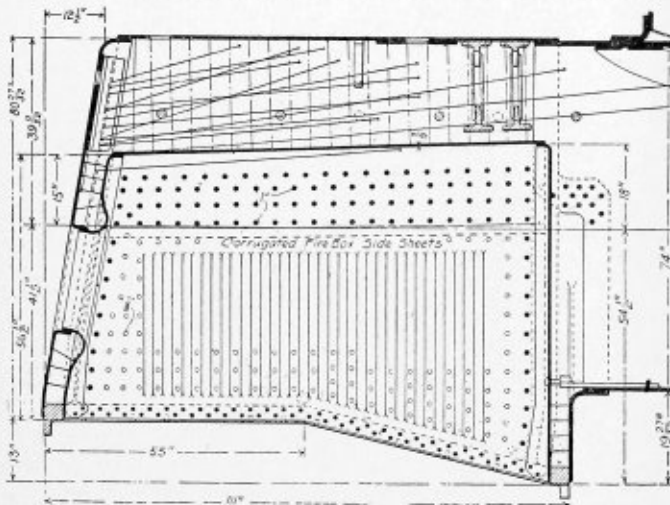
FIRE-BOX WITH CORRUGATED SIDE SHEETS AND O'CONNOR DOOR SHEET.
